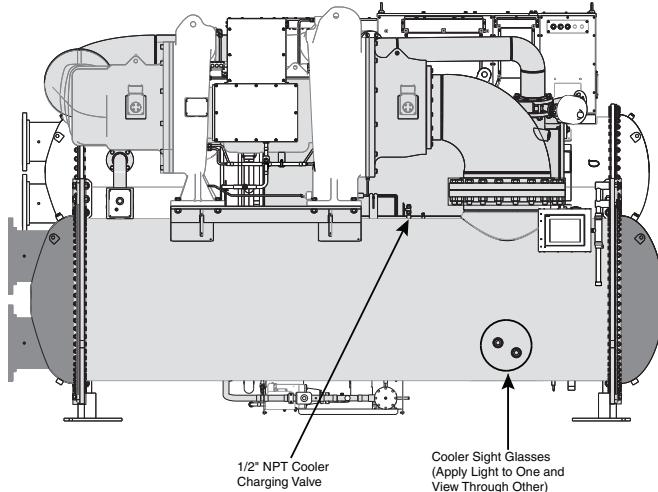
Evaporator Charging Valve and Sight Glasses
